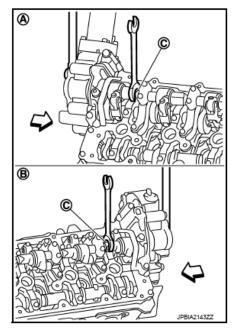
Tightening Control Shaft Mounting Bolts Using Wrench Courtesy of NISSAN NORTH AMERICA, INC.
